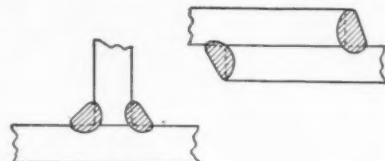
Double-fillet welded joints. These joints are capable of full strength under static loading with adequate-size fillets.
